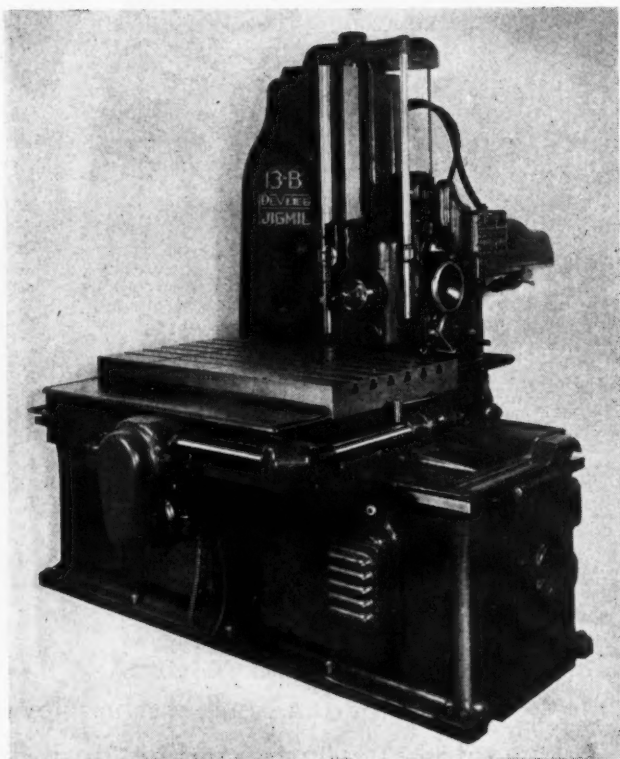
DeVlieg Improved Model "Jigmil" Equipped for Accurate Automatic Positioning
